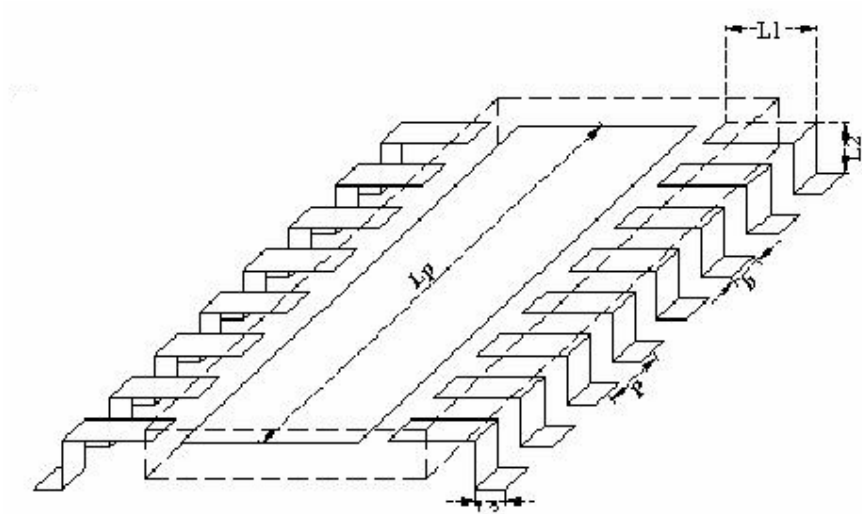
(b) Typical TSSOP 16 pins Package Geometry: Perspective View
